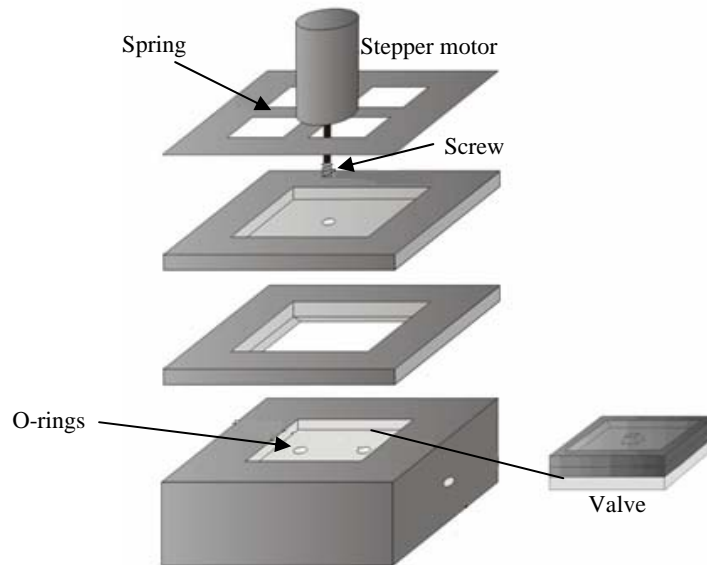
Fine machined part: Stepper motor mounted on a spring, metal block and metal screw.
